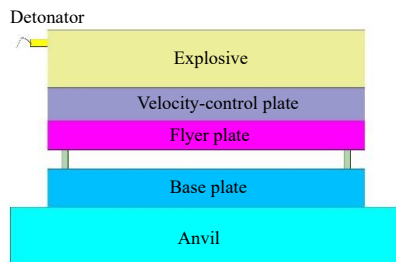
Schematic diagram of explosive welding experiment device
